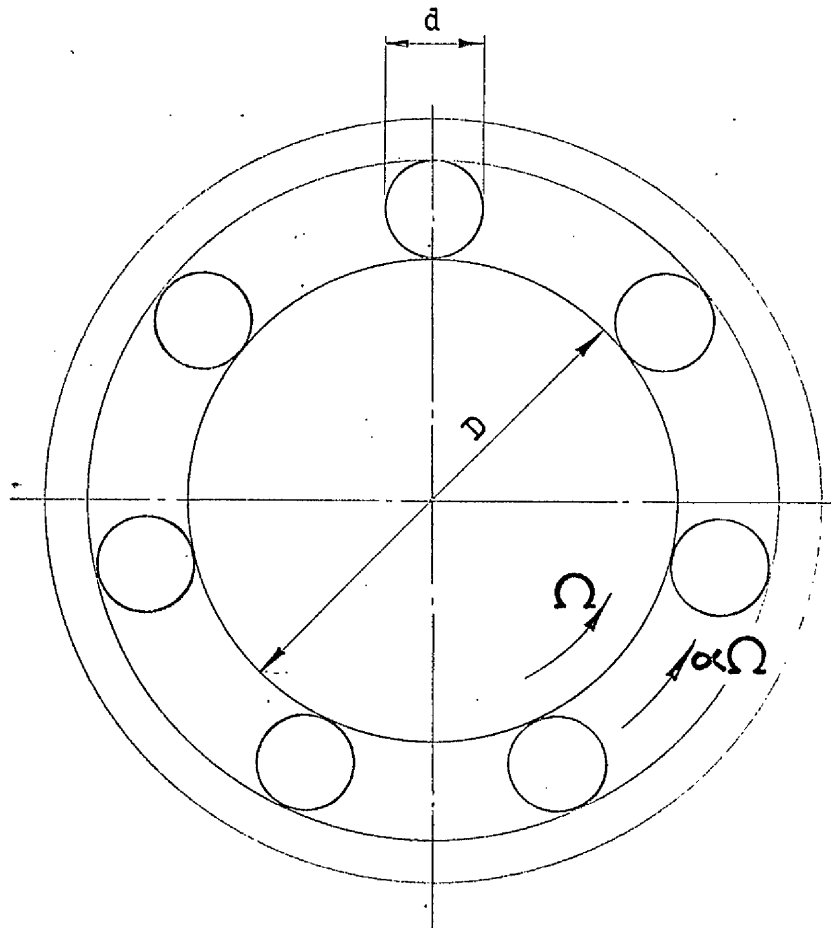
(a) Precession of ball assembly in a ball bearing.
